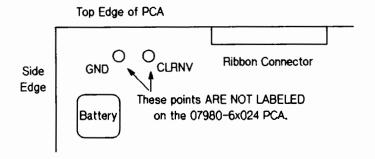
Data Buffer PCA GND/CLRNV Jumper Points
